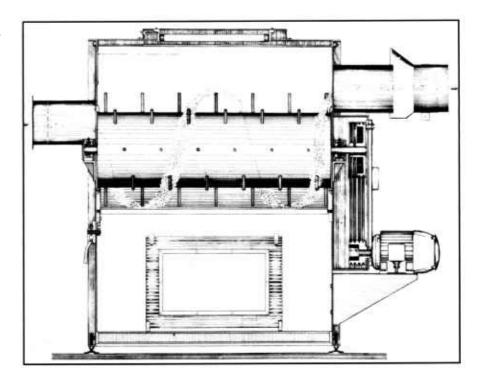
Step cleaner (courtesy of Marzoli, Inc.)
